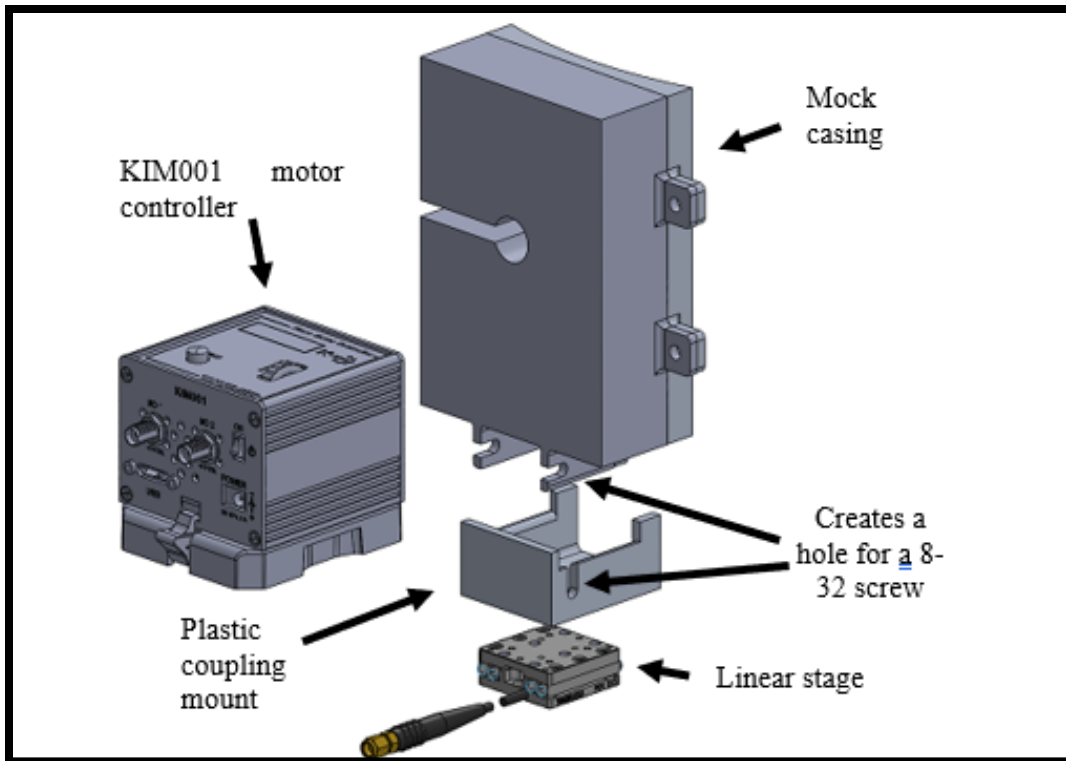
Exploded View of Translation Stage, Casing Grip Mount, and Mock Casing.
